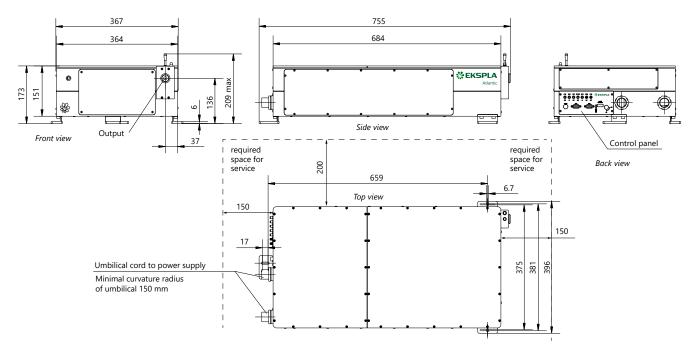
Outline drawings of Atlantic 50, 80 laser head with a single 1064 nm output (dimensions in mm)
